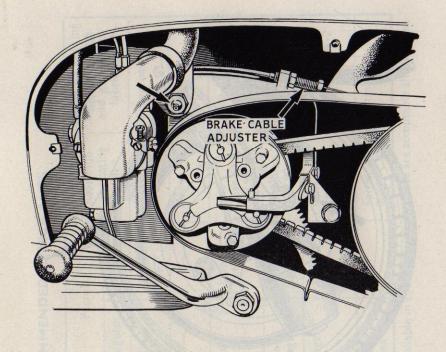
Left Cover removed (grease point of Swinging Arm and rear Brake Adjuster).
